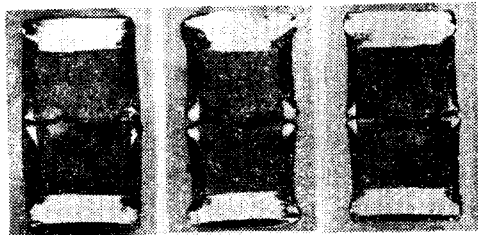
Fracture appearance of Charpy specimens at -196°C. (A-CPSN)
